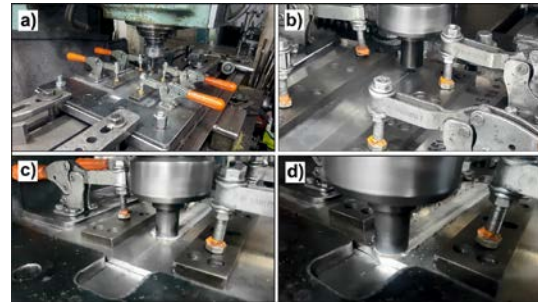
Stages of friction stir welding process (a) Tool-pin's approach to the plates; (b) Plunging of the tool-pin between the plates; (c) Advance movement of the tool-pin; (d) Completion of the weld seam.
